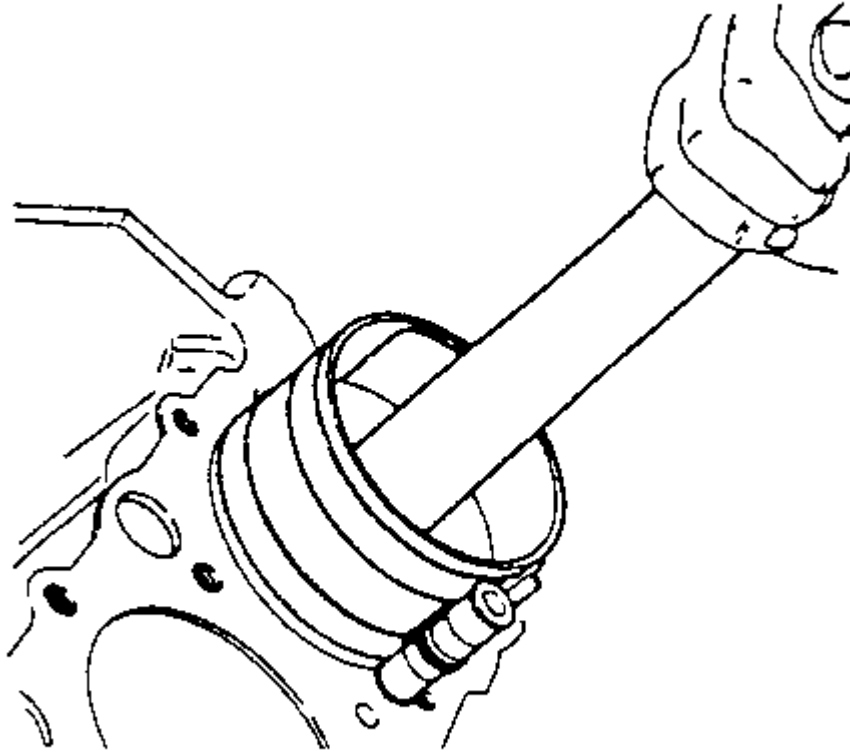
Installing Piston & Connecting Rod Assembly Into Cylinder
